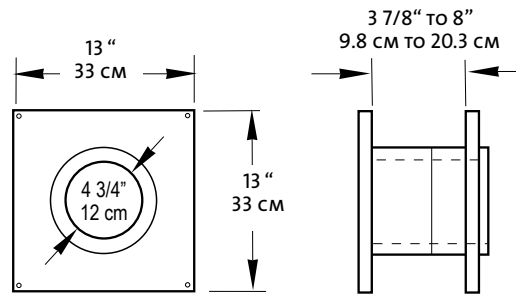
Approved Wall Pass-Through, Simpson Dura-Vent Wall thimble #3134.
